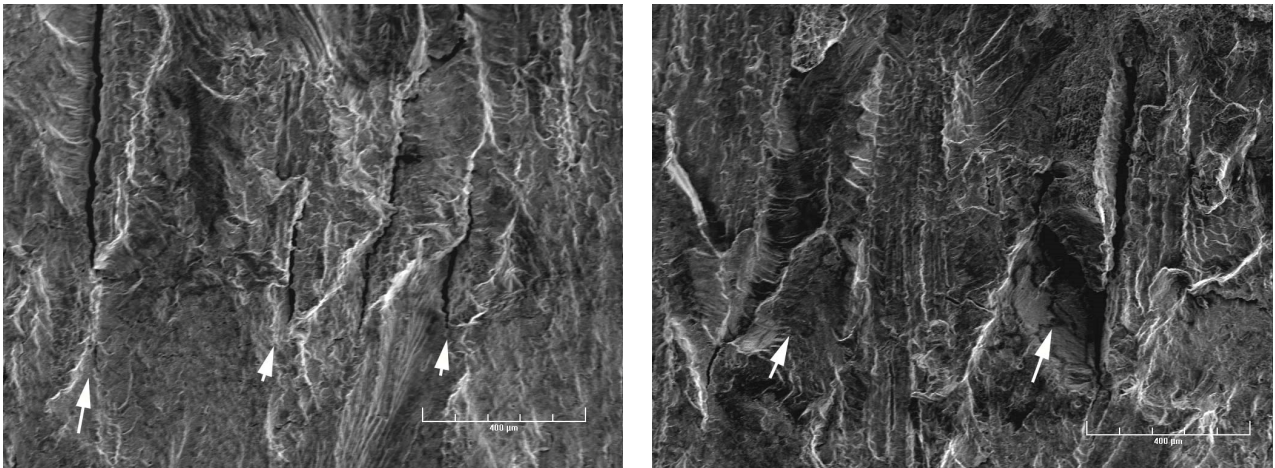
(a) Out of plane, secondary IG cracks and (b) ligaments on the fracture surface of specimen A152-TS-5, IG-2. White arrows indicate secondary IG cracks and ligaments. Crack advance is from bottom to top.
